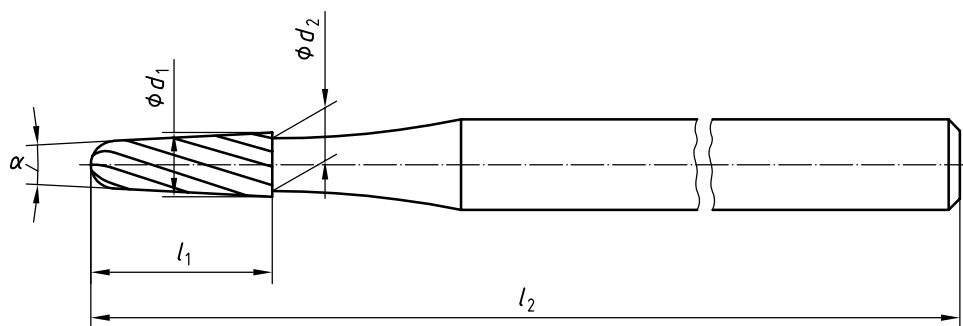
Conical, sharp edge, head length above 6,5 mm, carbide finishing burs
